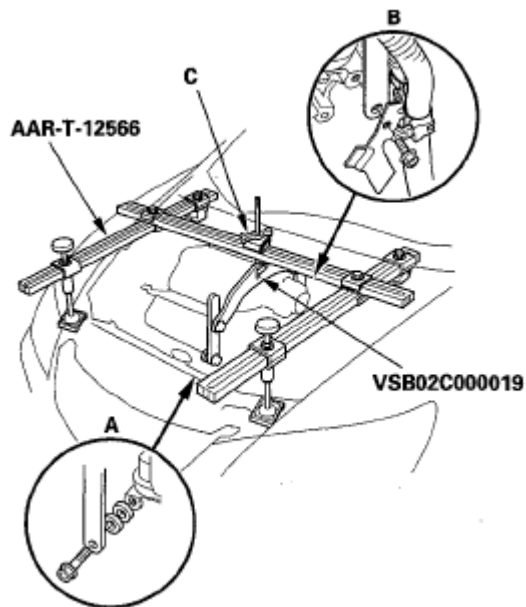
Identifying Engine Balancer Bar, Front Arm And Rear Arm
